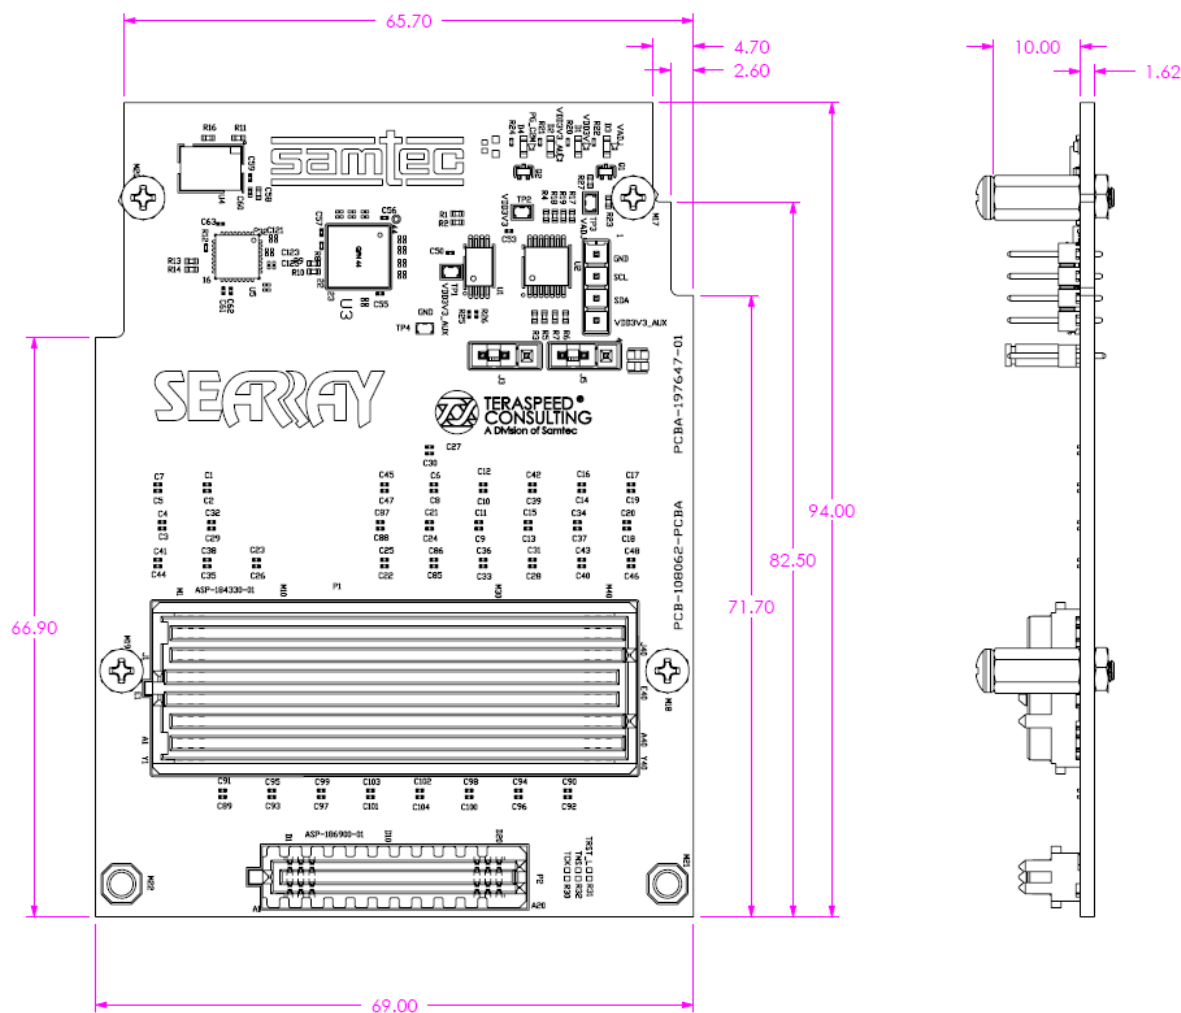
Mechanical Dimensions for HSPC/HSPCe Loopback Card
